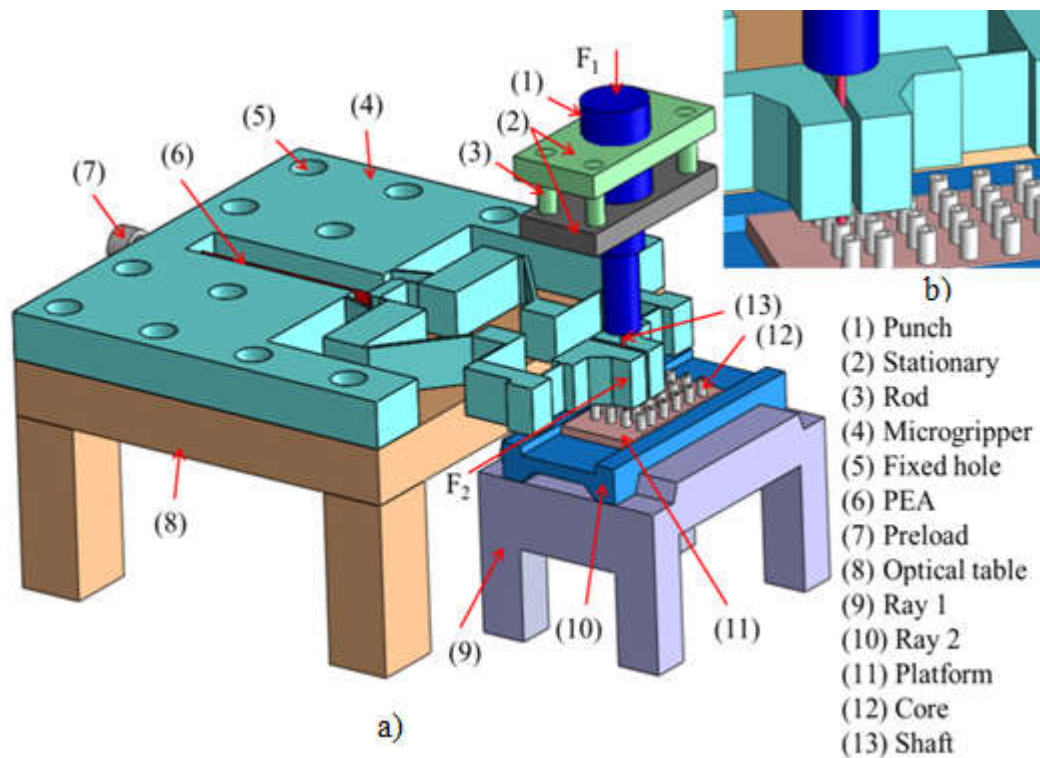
1: Assemble system for the mini vibrating motors: a) Assembling system, b) Details of motor shaft and core.
